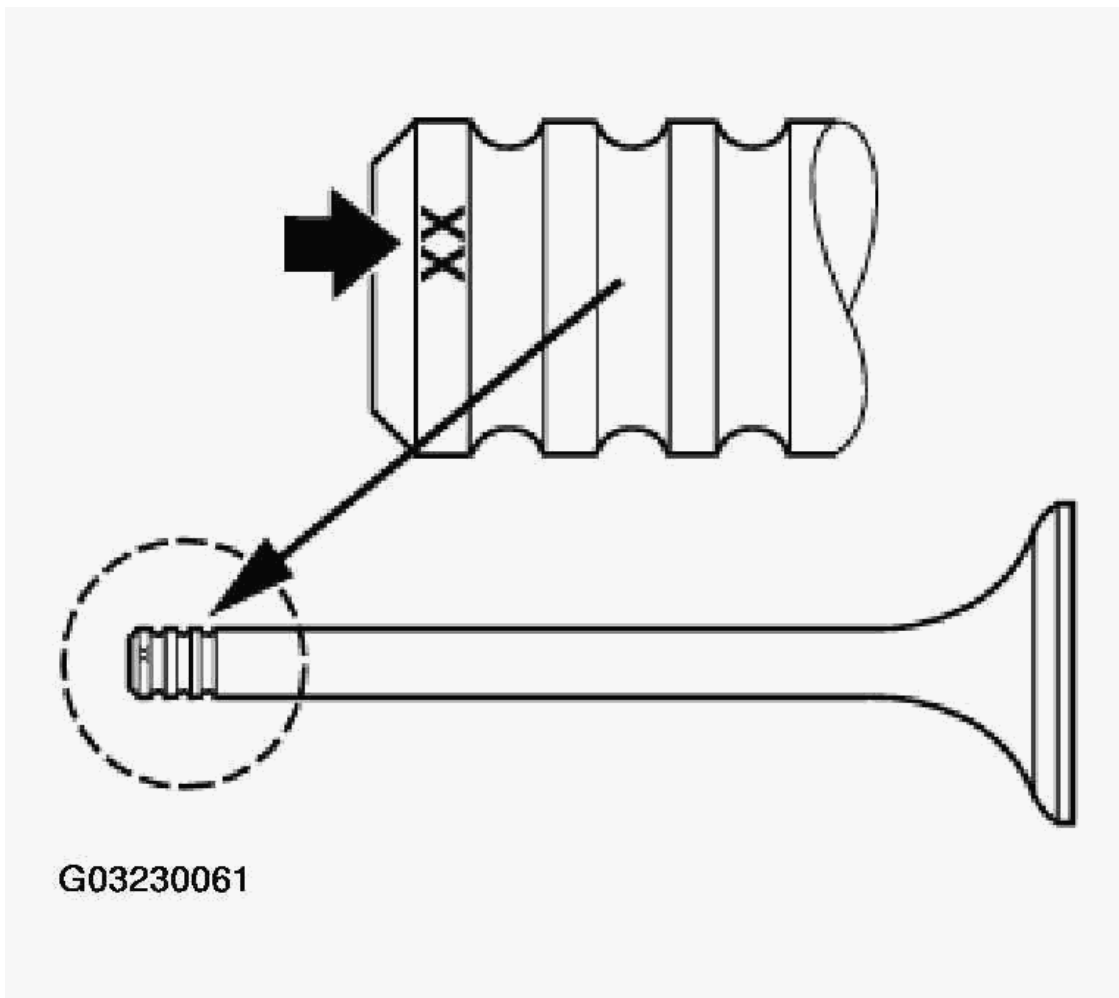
Identifying Repair Valve With Larger Shaft Diameter
